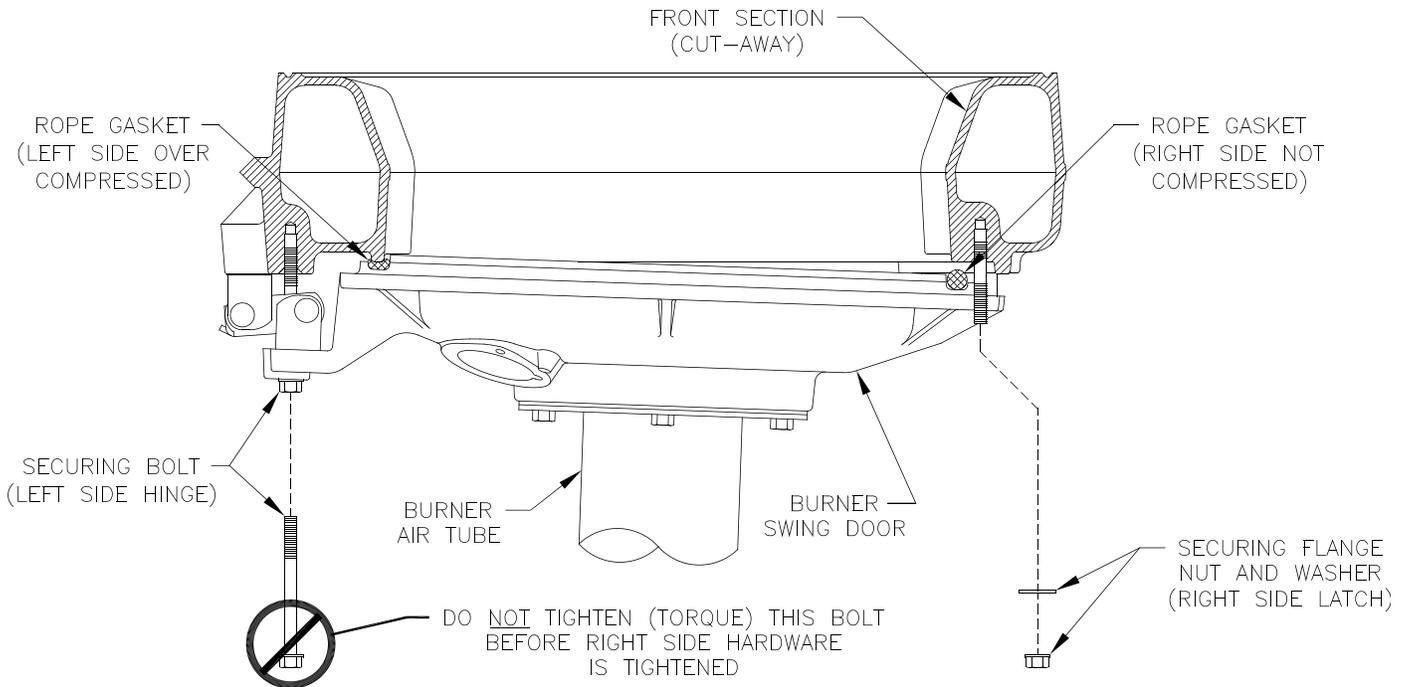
Top View - Burner Swing Door Fully Closed but Not Properly Secured or Sealed
